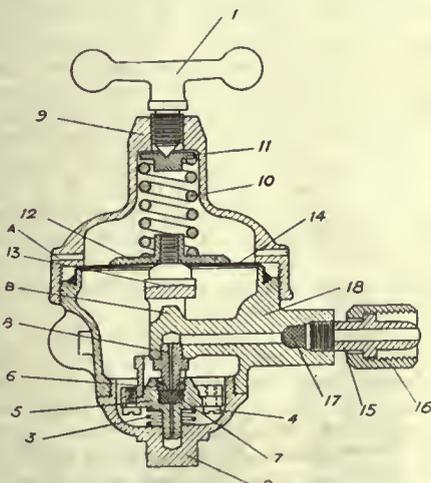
VIEW SHOWING SECTION OF PERFECTYPE REGULATOR.
